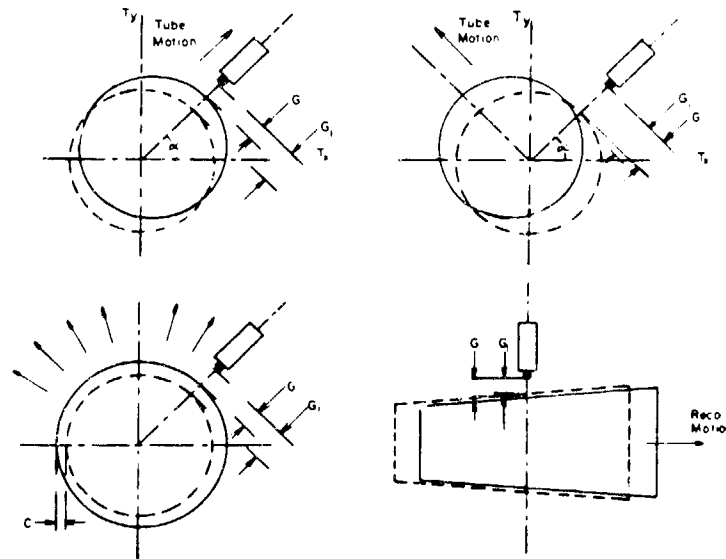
Change of gap between proximity probe and gun tube due to (a) tube motion parallel to the probe axis, (b) motion perpendicular to the tube axis, (c) expansion of the tube, (d) recoil motion
